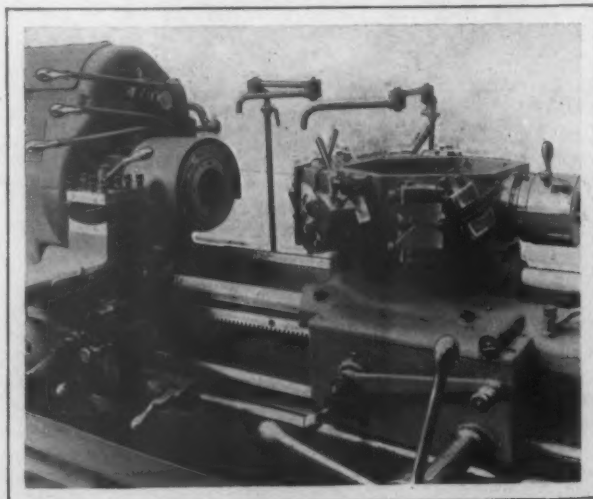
View of the Headstock and Turret Showing Taper Attachment on the Carriage
